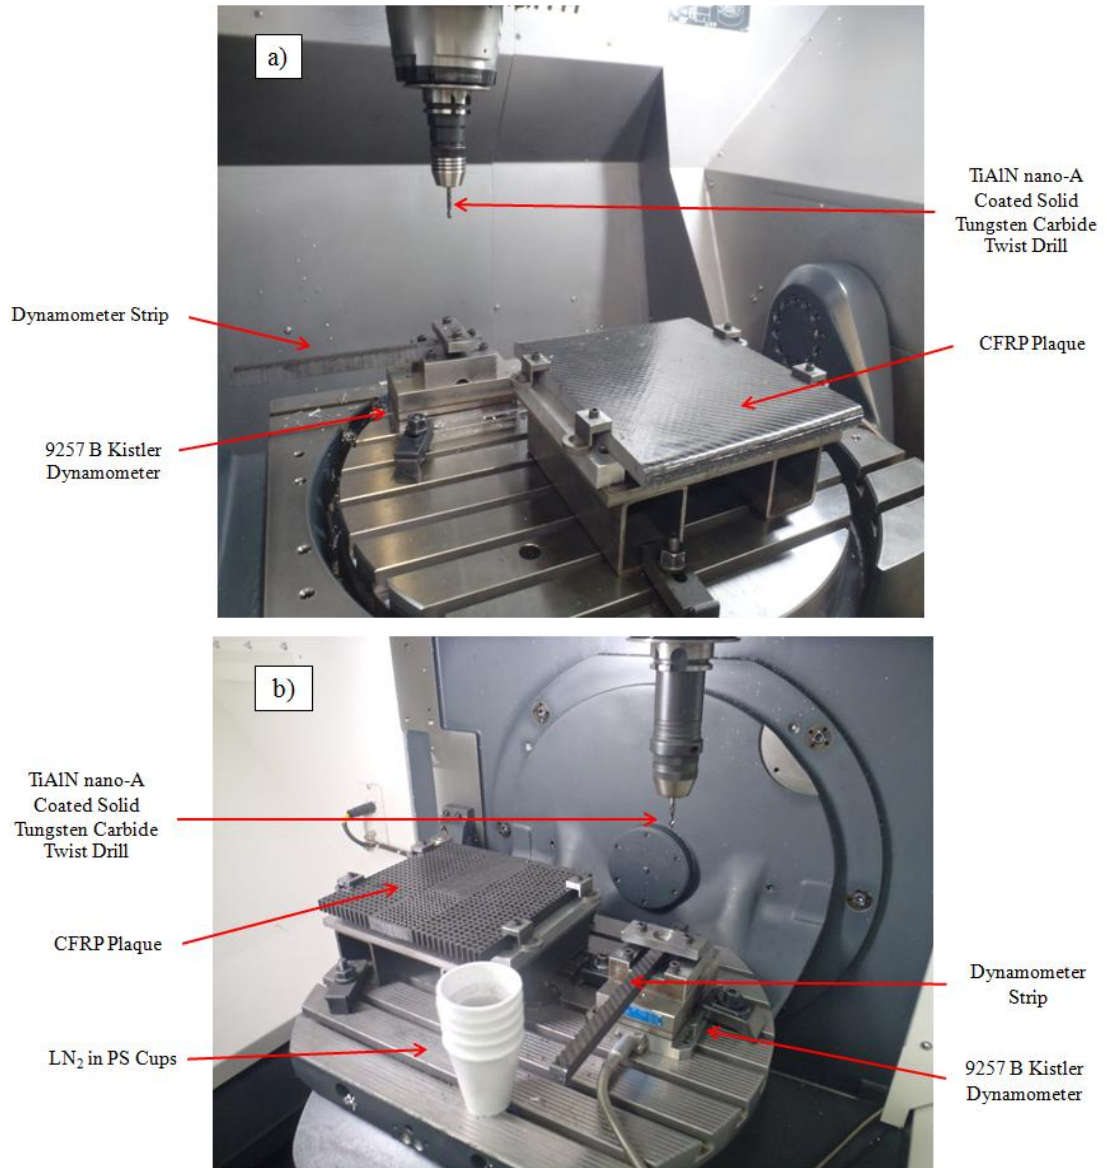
Set-up of (a) the drilling experiment on CFRPs when machined dry at room temperature (Test 1) and (b) the drilling experiment on CFRPs when machined with a tool pre-cooled in LN₂ (Test 2)
